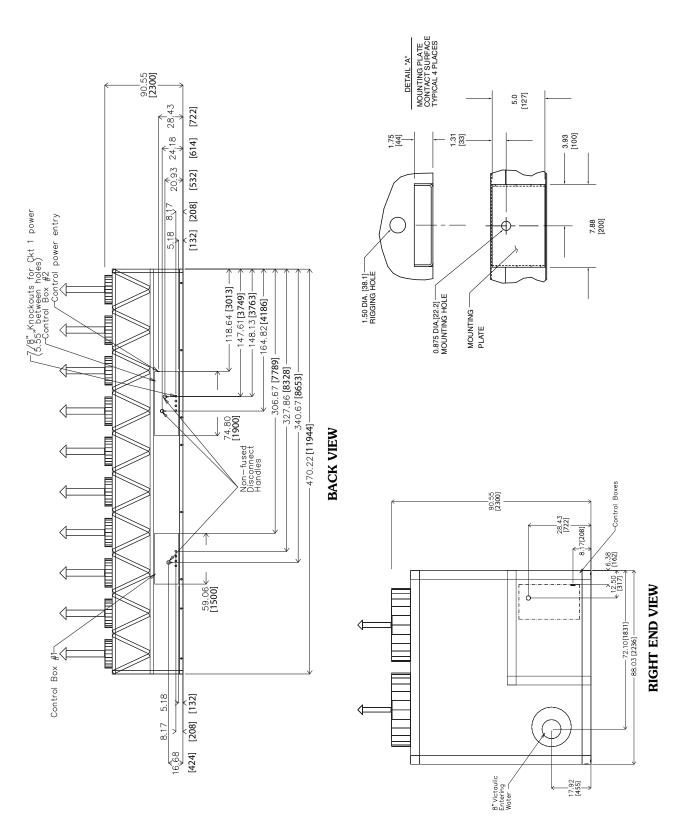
30XA400 Air-Cooled Liquid Chiller with Single Point Connections Dimensions (cont)
